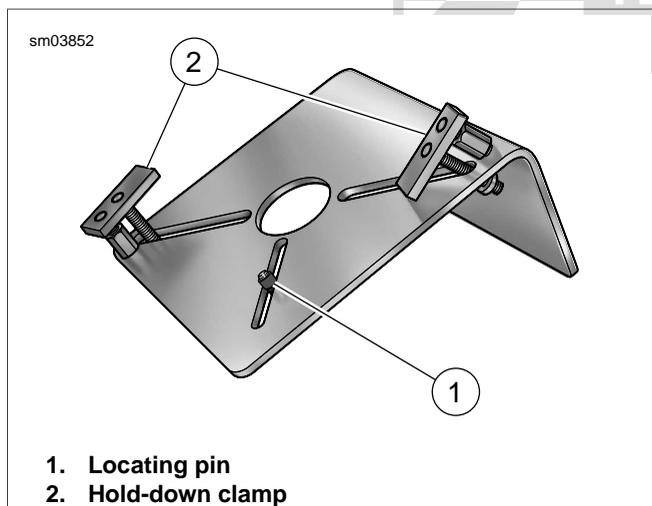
Flywheel Fixture (Part No. HD-44358)
